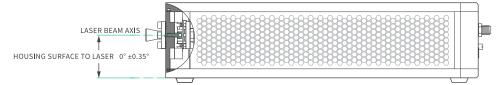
mmRH-5591 Mechanical Dimensions, Bottom View
